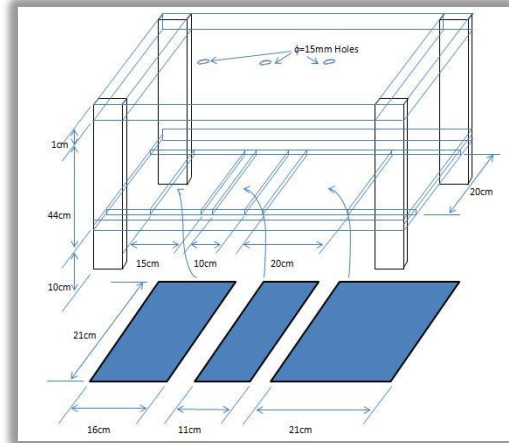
The-Test-Unit Dimensions Needed to Execute the Impact Process
